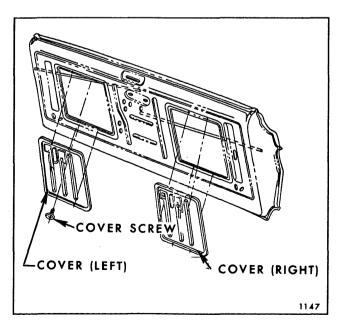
Tail Gate Inner Panel Access Hole Covers
